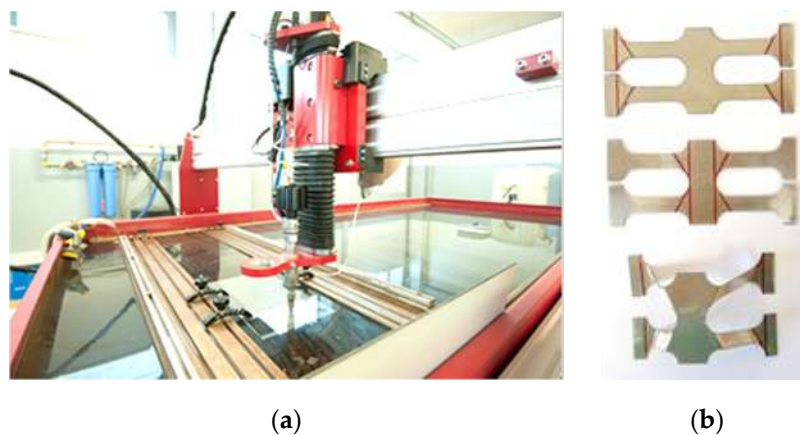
(a) Manufacturing method of the perforated profile (b) specimens used for the experimental testing.
